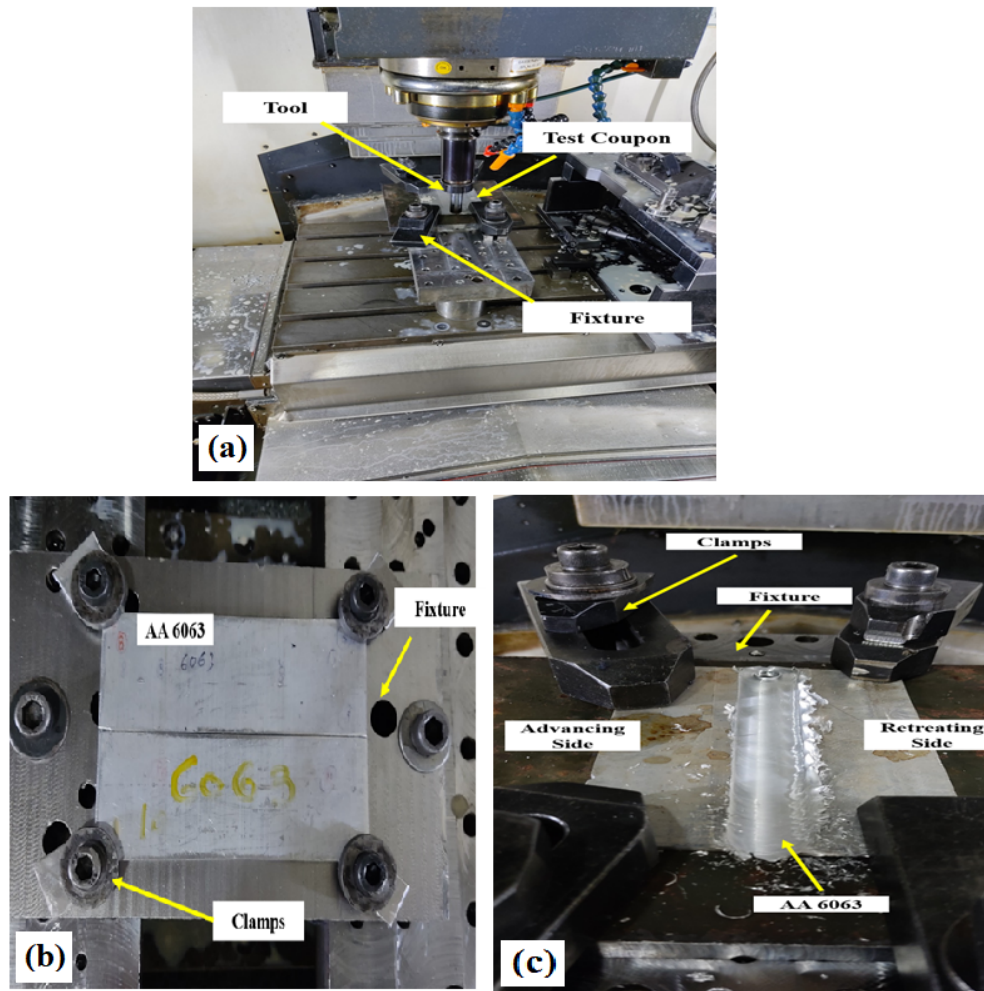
Experimental setup of FSW process (a) Tool Setup (b) Fixture Setup (c) Welded sample of AA6063 at CNC
